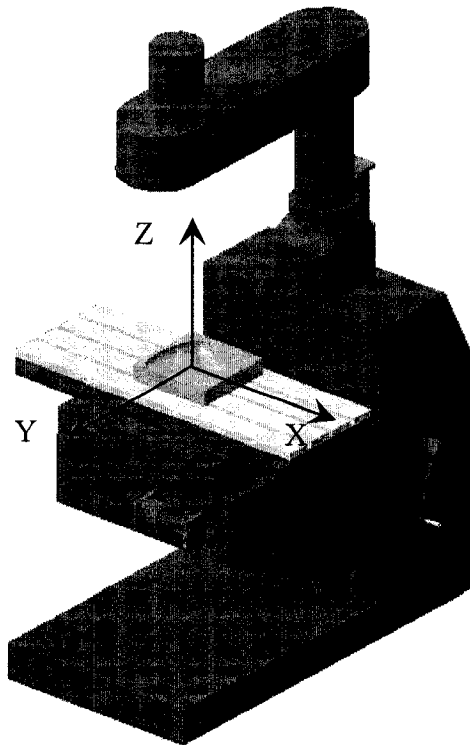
Example of a hair dryer mold, which is set up in 3-axis CNC machining
